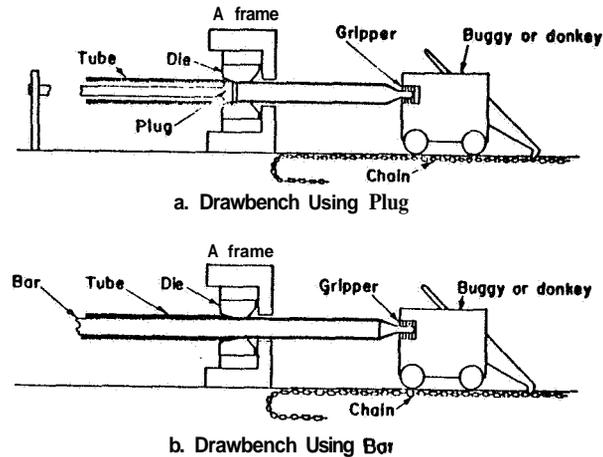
SCHEMATIC DRAWING OF TUBE DRAWBENCH (Ref. 53)
